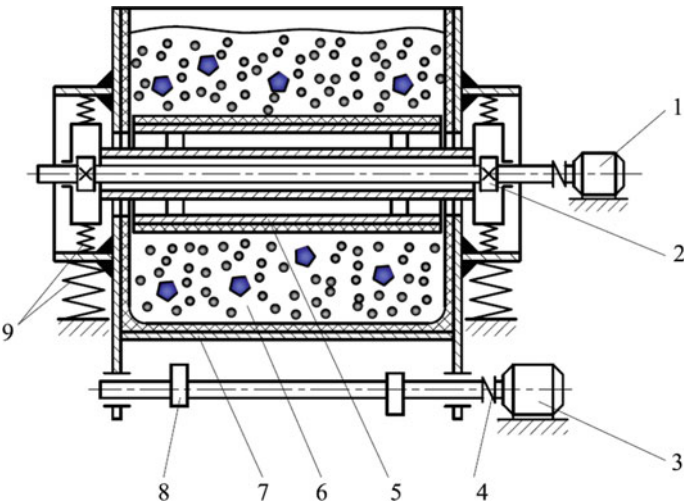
Structure principle diagram of the double vibration source vibratory barrel finishing method. 1, 3—Motors; 2, 8—vibration generators; 4—coupling; 5—vibration transfer unit; 6—workpiece and medium; 7—container; 9—spiral spring
